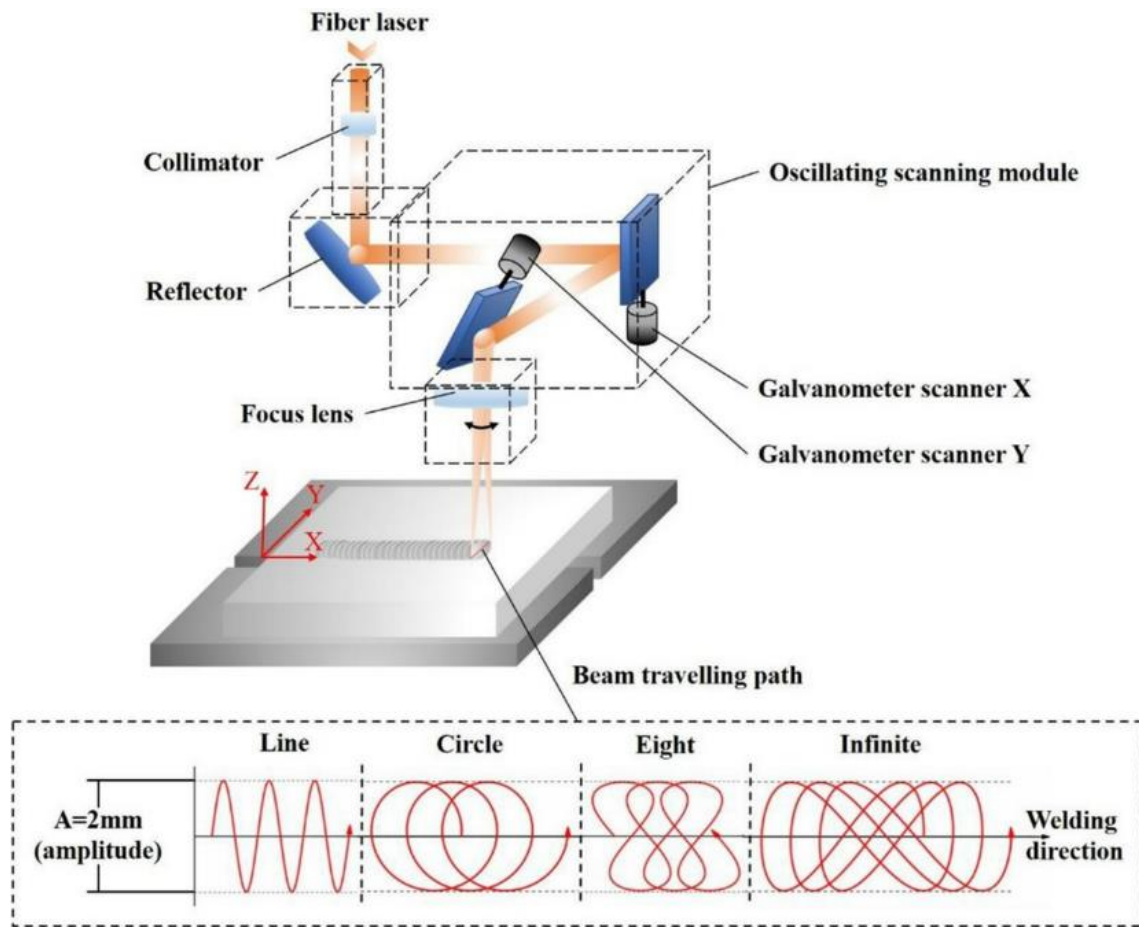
Experimental set-up of wobble laser welding, with common wobble patterns presented. Reprinted with permission [88]. Copyright 2022, SAGE Publications.
